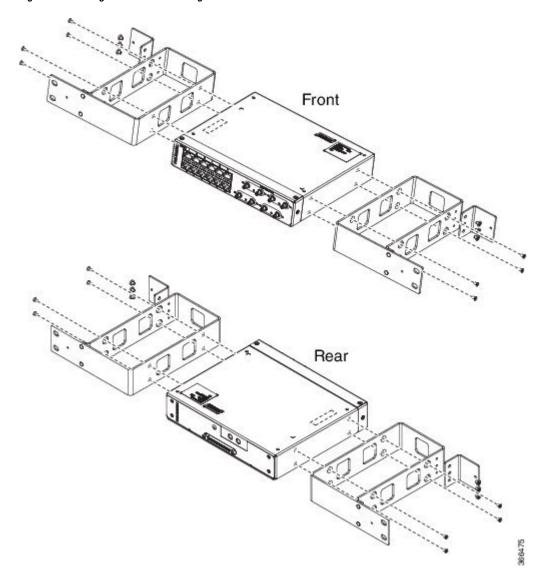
Installing the Patch Panel - Single in a 21-inch Rack
